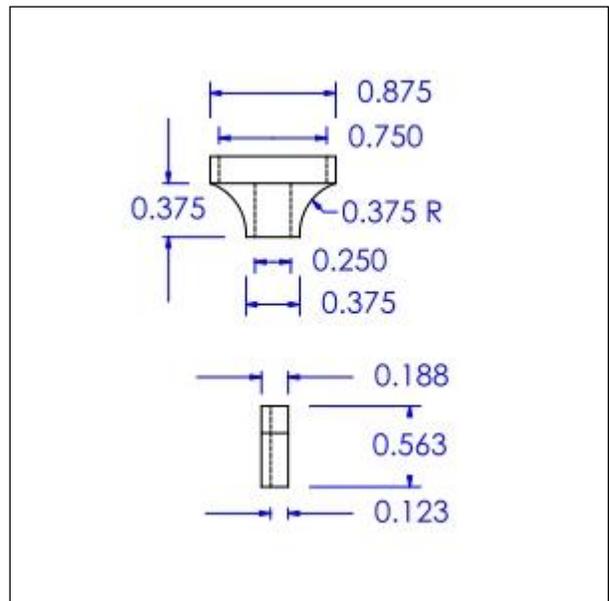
Construction drawing of the connectors. The material is 3/16" thick brass.
